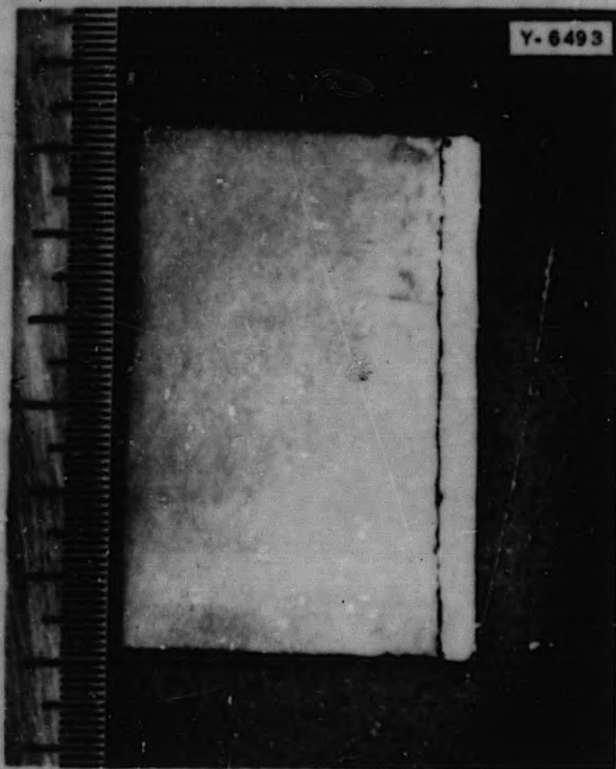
Longitudinal Section Through Plate of Uranium-Zirconium Showing Shrinkage Cavity Below Weld. 5X.
